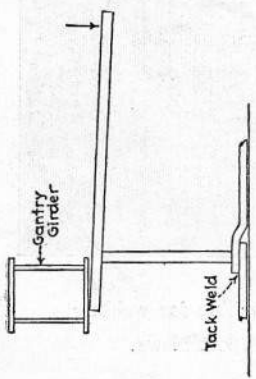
Method of using girder of gantry automatic welding machines for bulkhead assembly
